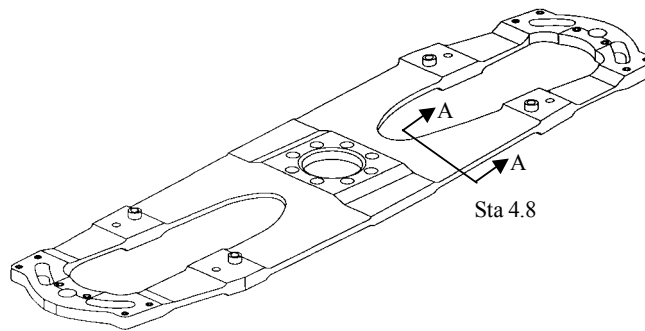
MAIN ROTOR YOKE GEOMETRY
